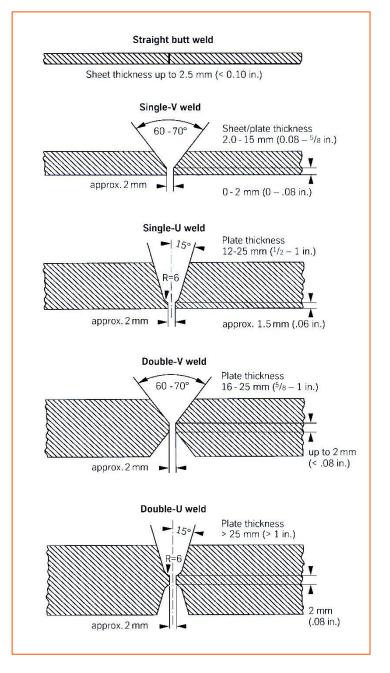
Edge preparations for welding nickel alloys and special stainless steels
